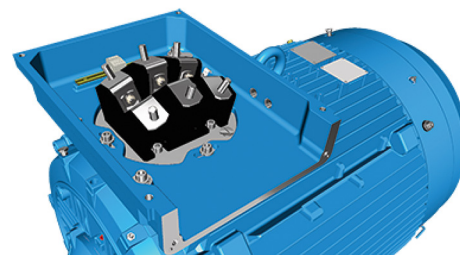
Terminal board for motor sizes 280 - 315, except LKC.
